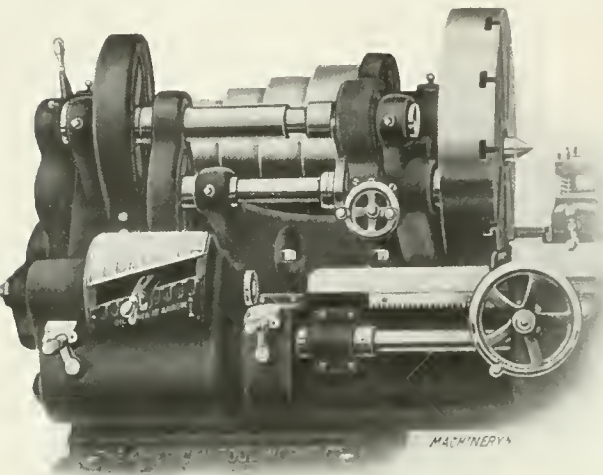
Detail View of American Lathe with Cone-pulley Drive
